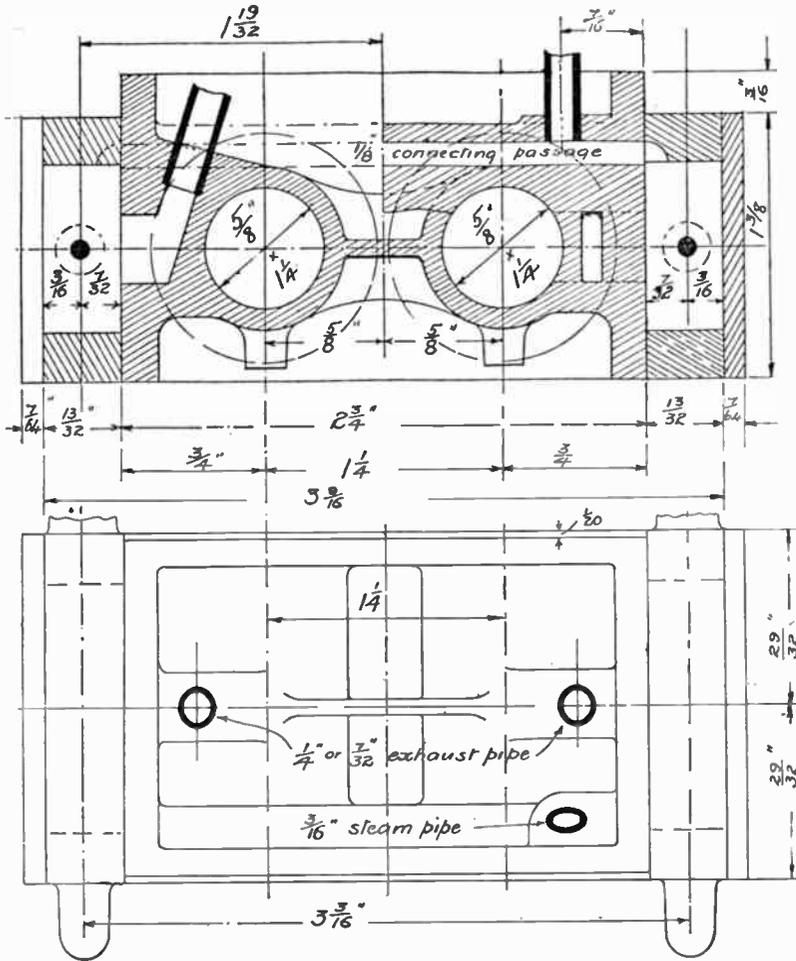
CROSS-SECTION AND PLAN OF ALTERNATIVE TWIN HIGH-PRESSURE CYLINDERS FOR SMALL MODEL UNDERTYPE ENGINE.
